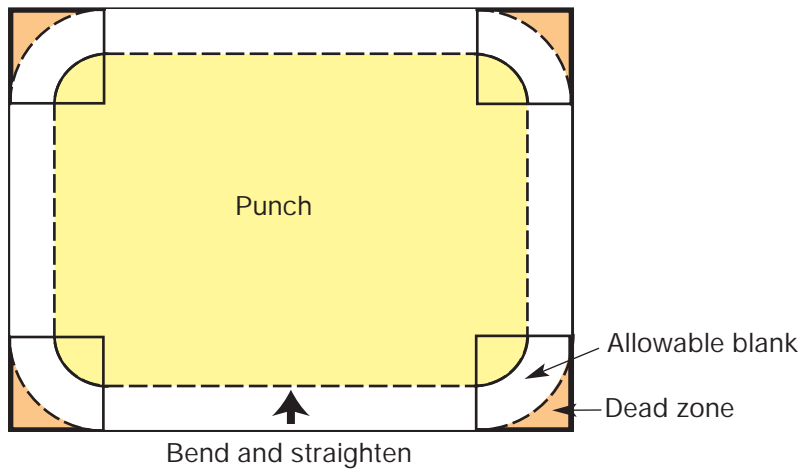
The four corners of a rectangular box drawn from a rectangular blank generate problems almost identical to those in a cylindrical cup drawn from a square blank as shown in Fig. 2.
